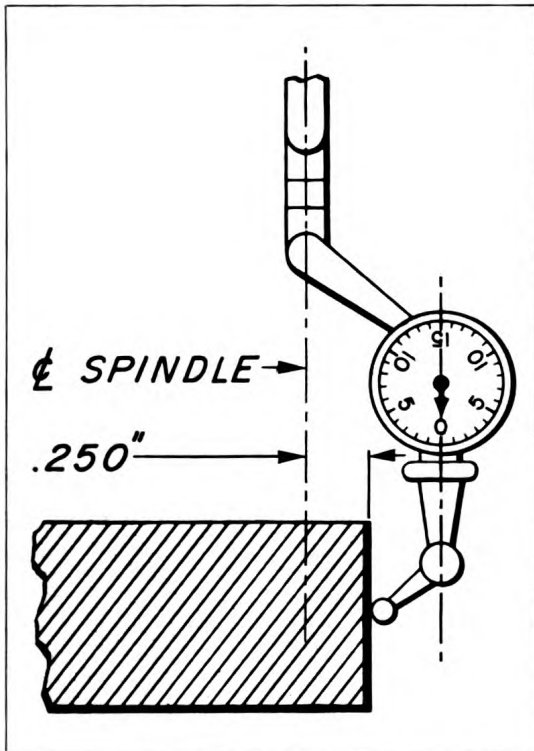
The reference edge must be moved past the spindle axis in order to measure male radii.
